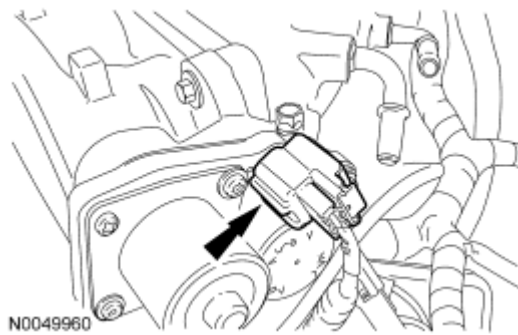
Locating Throttle Body (TB) Control Electrical Connector
